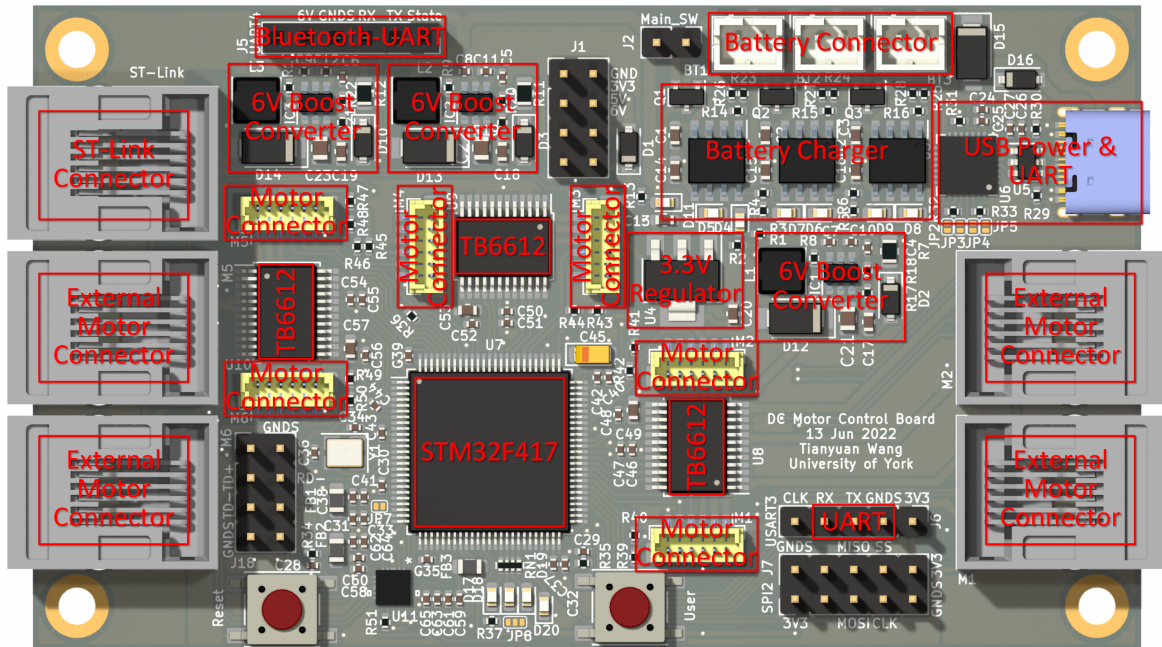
The front view of the controller PCB with components populated. The Bluetooth to UART module connects to the board through the connector labelled J5 on the top left corner of the board. The dimension of the board is  $95.6 \times 55.6 \times 12$  mm.
